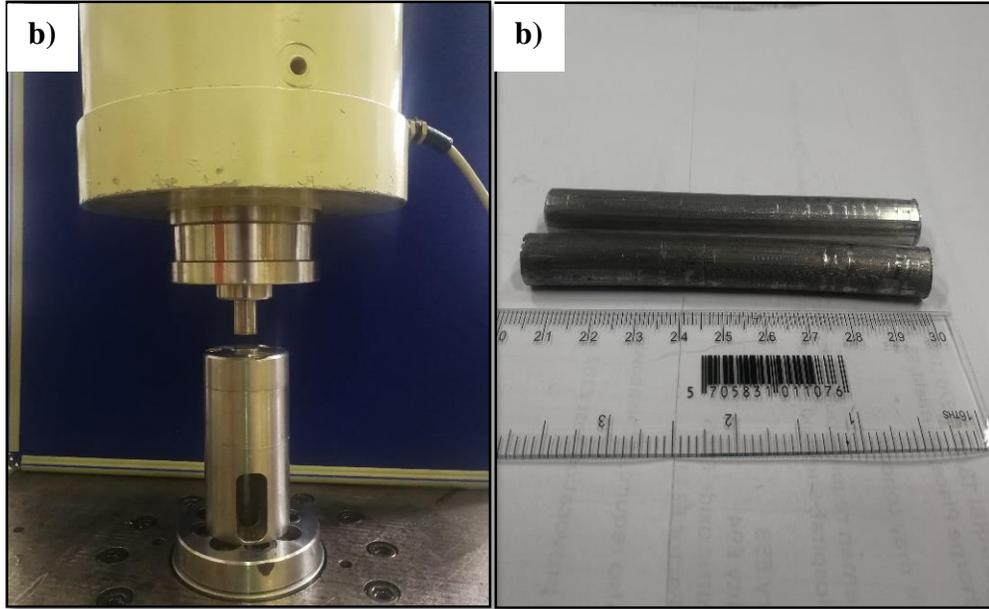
a) Experimental setup of extrusion using a hydraulic machine and b) Specimen rods deformed by extrusion
